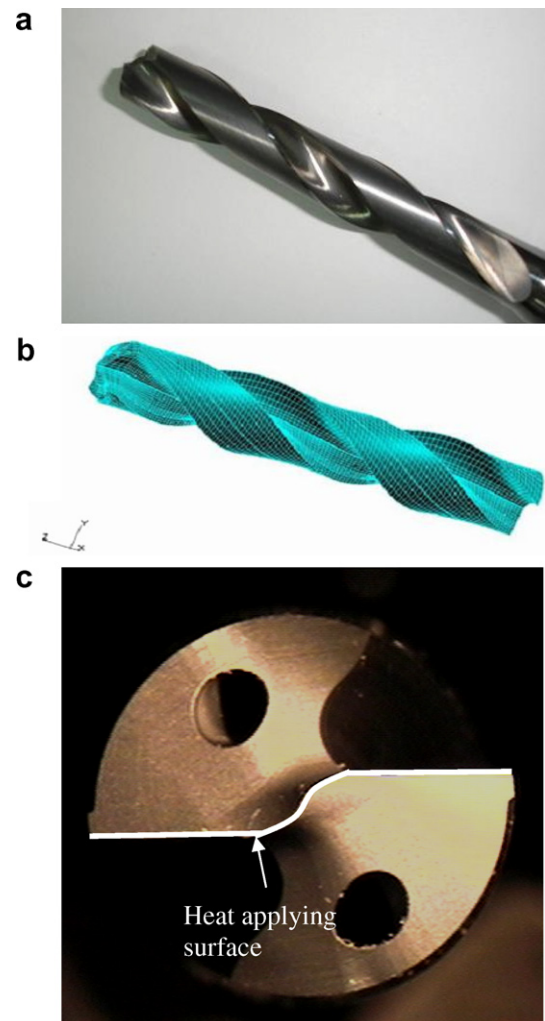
(a) The drilling tool, (b) the grid system of drilling tool and (c) the heat applying surface.
